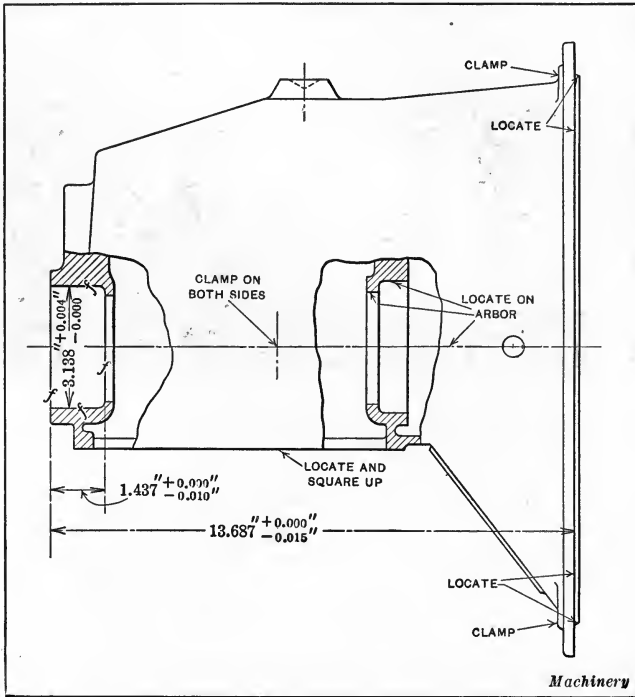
Operation Drawing for counterboring the Main Bearing Hole in the Small End and facing the Boss
